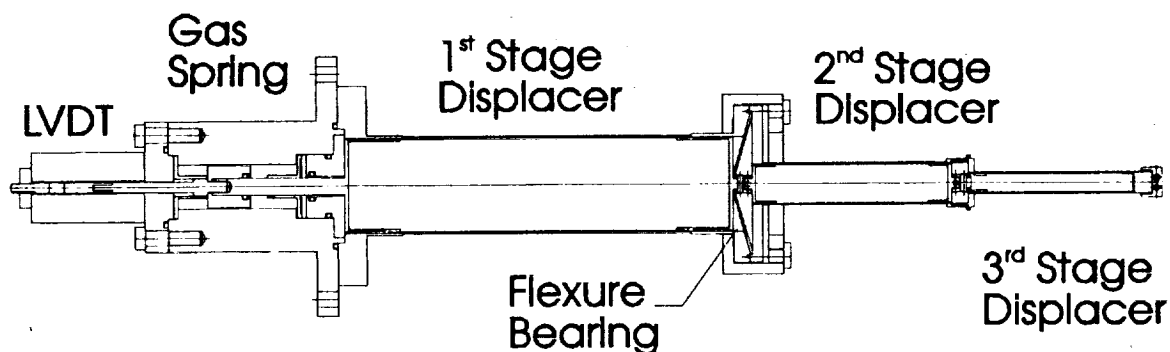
Expander Assembly from APD Drawing 259949B-P.
